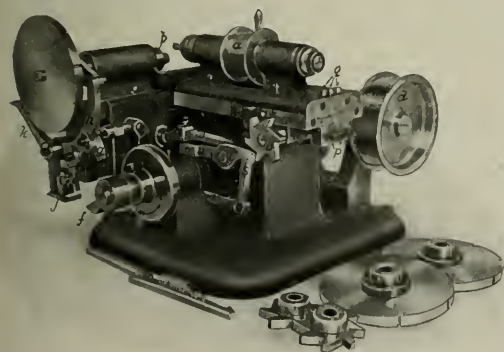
Side View showing Indexing and Feeding Movement of Pinion Cutter.
